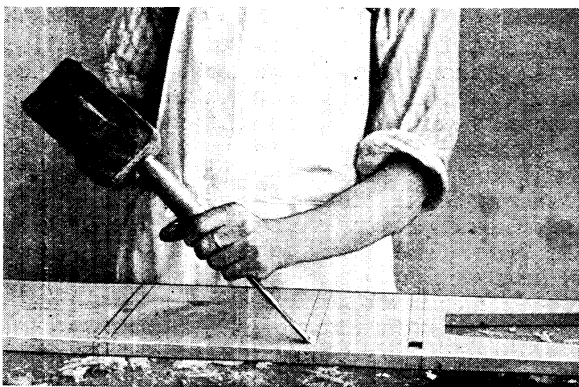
Accommodating the shelves by cutting housing grooves; chipping out a recess at the stopped end
